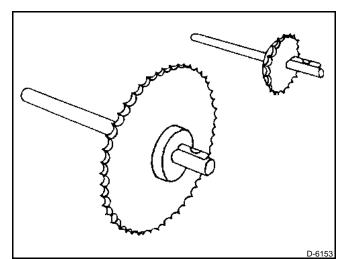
The shafts that the driver and driven sprockets are mounted on are in the same location, level with each other.
